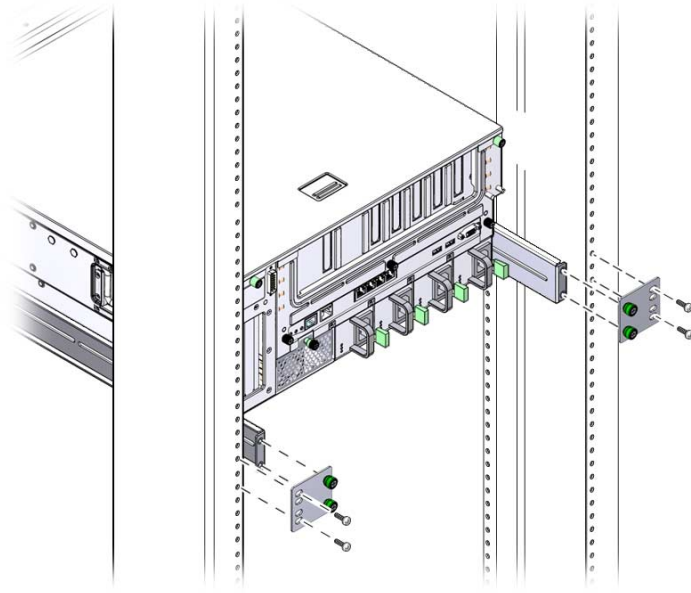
Attaching the Front Adjuster Brackets to the Rack
